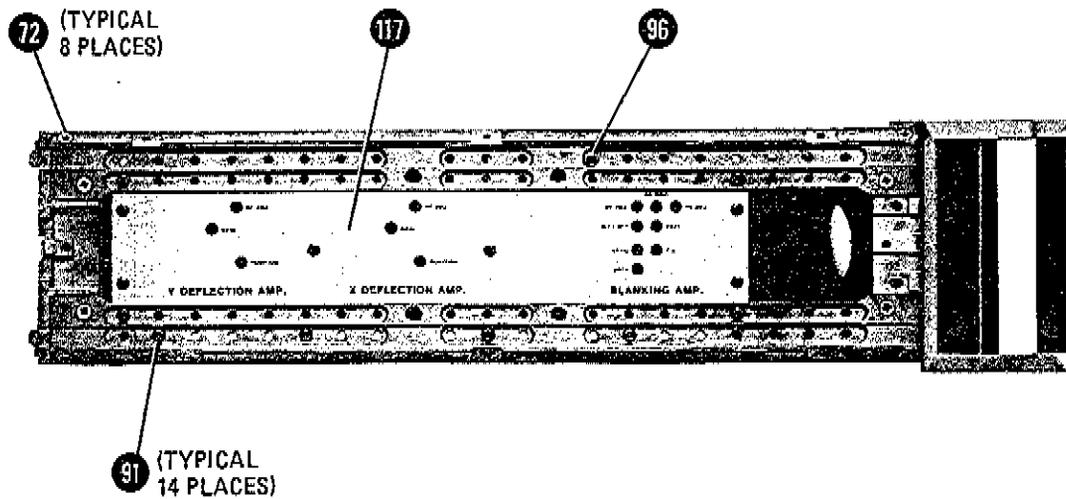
A3 Signal Processor Mechanical Parts Locations (4 of 4)
